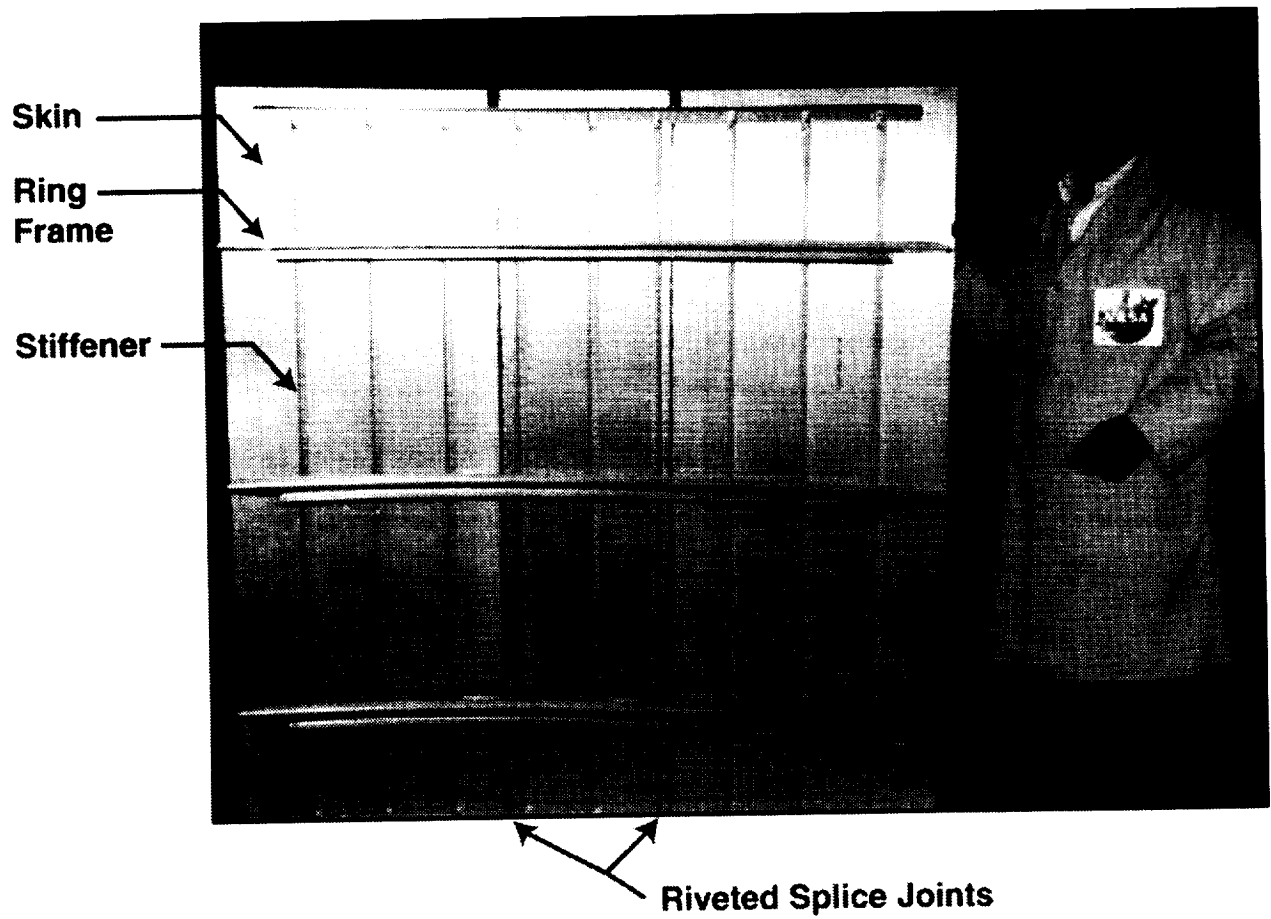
Tu-204 fuselage panel fabricated with 1441 Al-Li skin.
